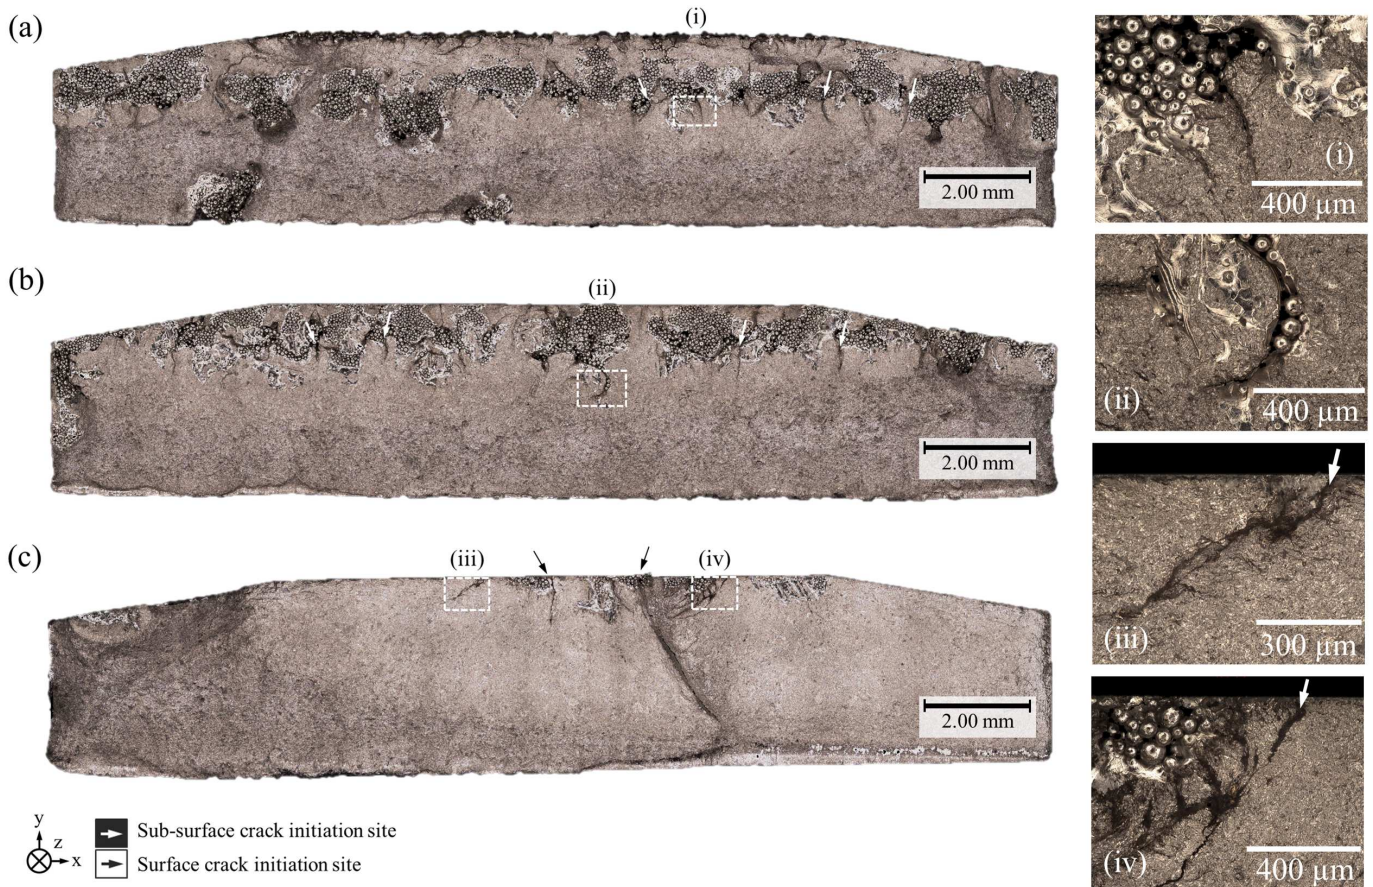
Confocal microscopy images showing example fracture surfaces of HIP'ed SEBM specimens - (a) shows a macrograph of specimen C6 with the test surface in its as-built condition, (b) shows specimen G6 machined to a depth of 0.50 mm, and (c) specimen E1 machined to a depth of 1.00 mm. (i)-(iv) Show higher magnification images of individual fracture surface features - (i) - (ii) show crack initiation at sub-surface LOF defects, (iii) shows crack initiation at the machined surface, and (iv) shows crack initiation near a surface exposed LOF defect.
